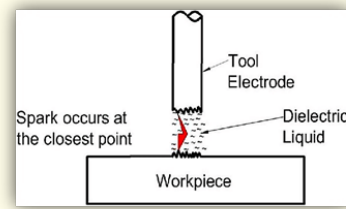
EDM process. Note: EDM, electrical discharge machining [13].
